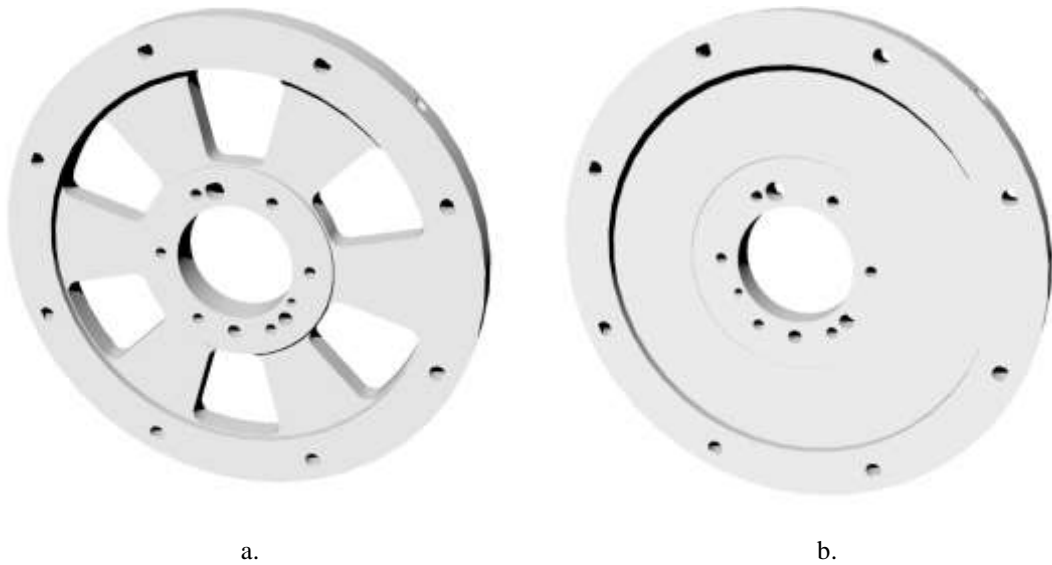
Prototype end shields for a. non-drive and b. drive end.
